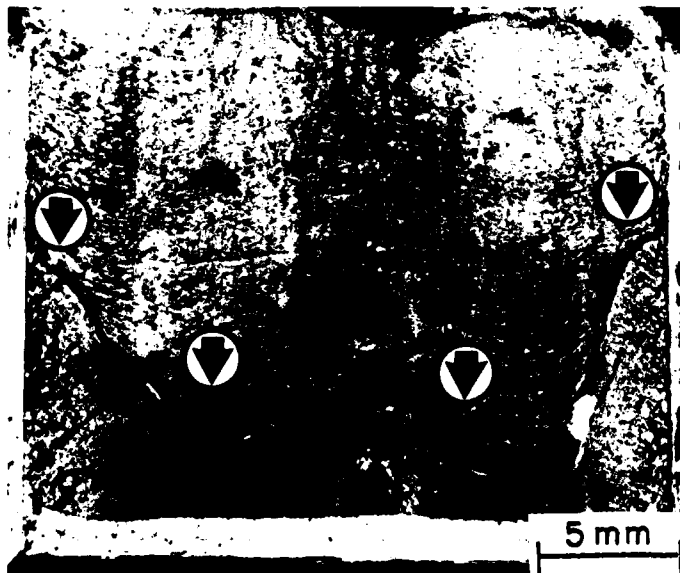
Fracture surface of the GTA weldment (arrows indicate the stress-corrosion crack front)
